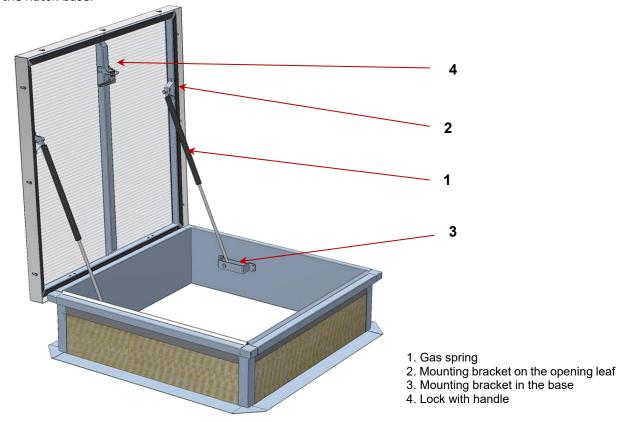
mcr PROLIGHT roof access hatch, type C or E, with gas springs.
